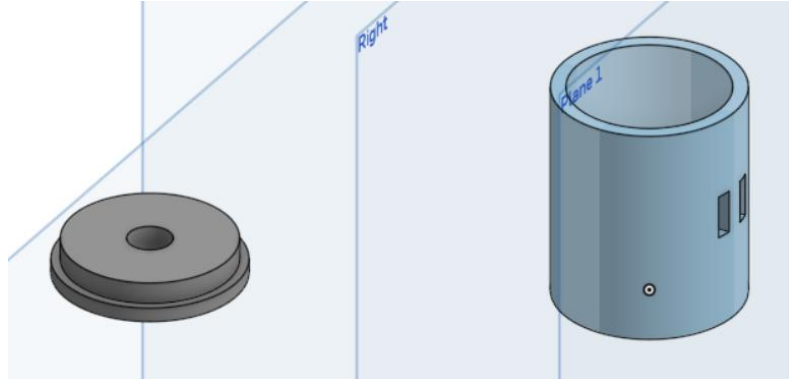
3D-printed lid (to the left) and shaft (to the right)
